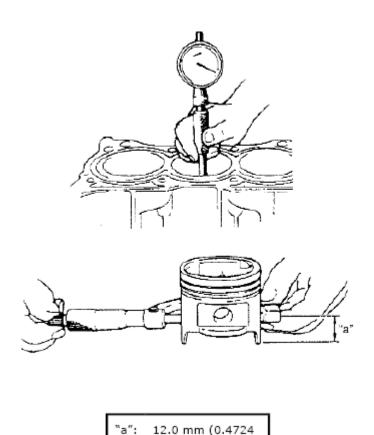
Measuring Cylinder Bore And Piston Diameter
